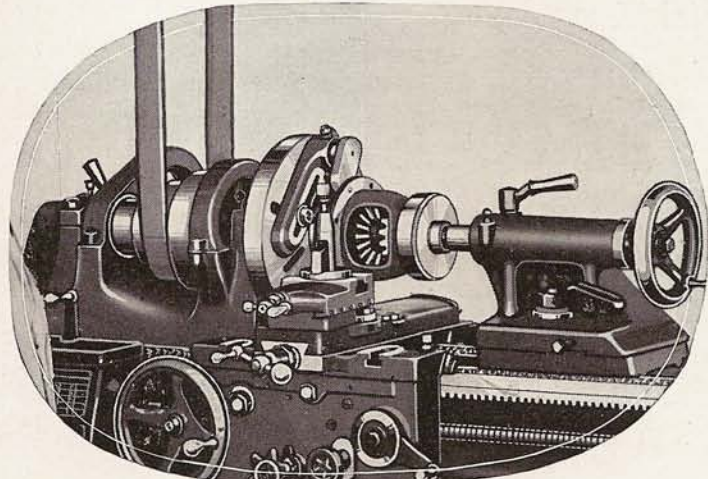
Truing a Differential Gear Case Flange for a New Ring Gear, in the 16-inch South Bend Lathe.
